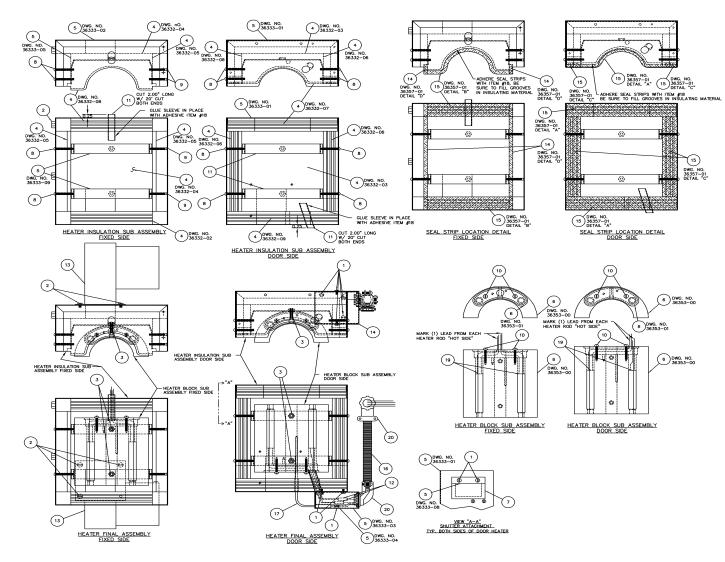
Heater Door & Fixed Assembly, Rev B
